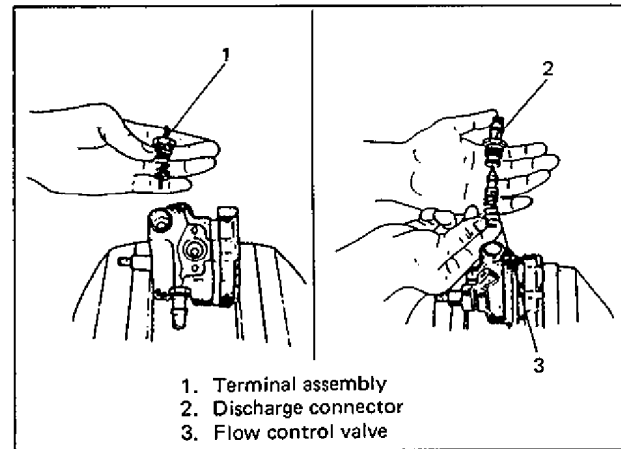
B1-61 Removing Terminal Assembly and Discharge Connector
